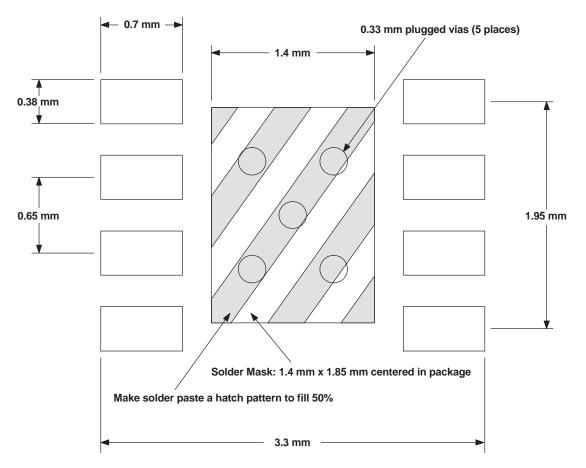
TPA2005D1 8-Pin QFN (DRB) Board Layout (Top View)
